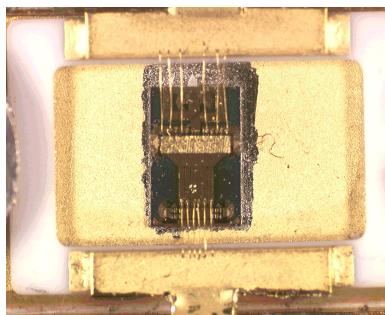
The close view of the packaged Si power transistor fabricated using new technology.
